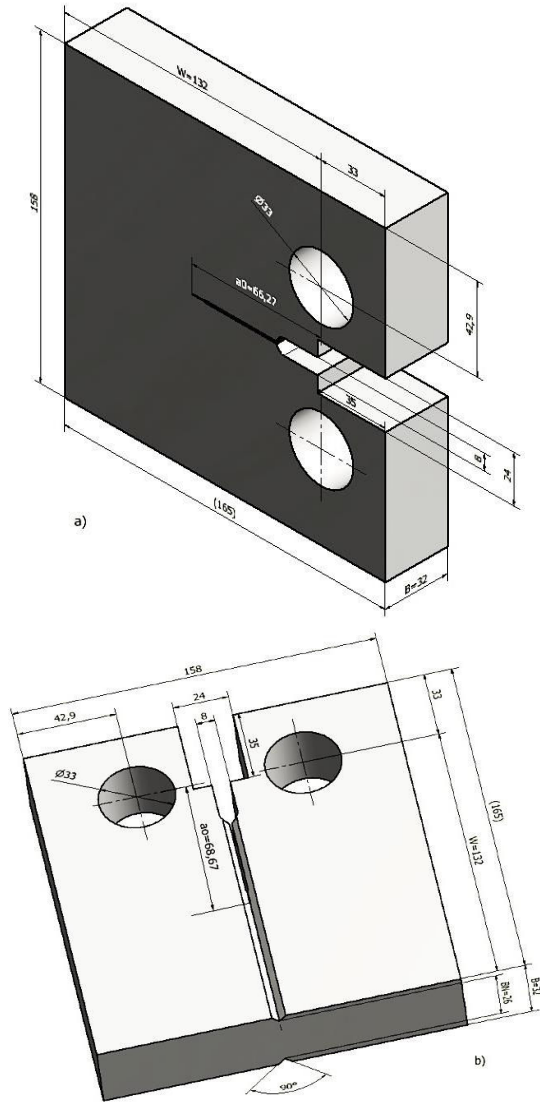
a) Flat surface 32mm thick C(T) specimen; b) grooved C(T) specimen, with 20% side grooves in the crack plane.
